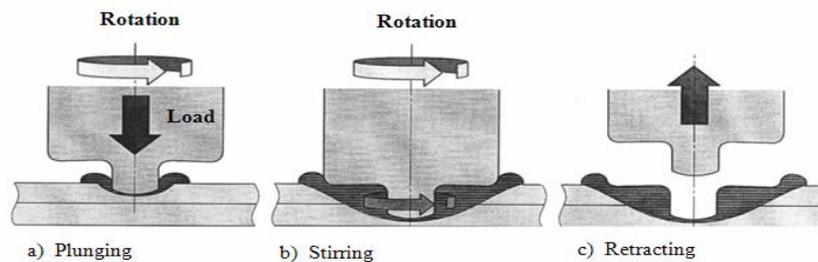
Friction stir spot welding (FSSW) process [1]
